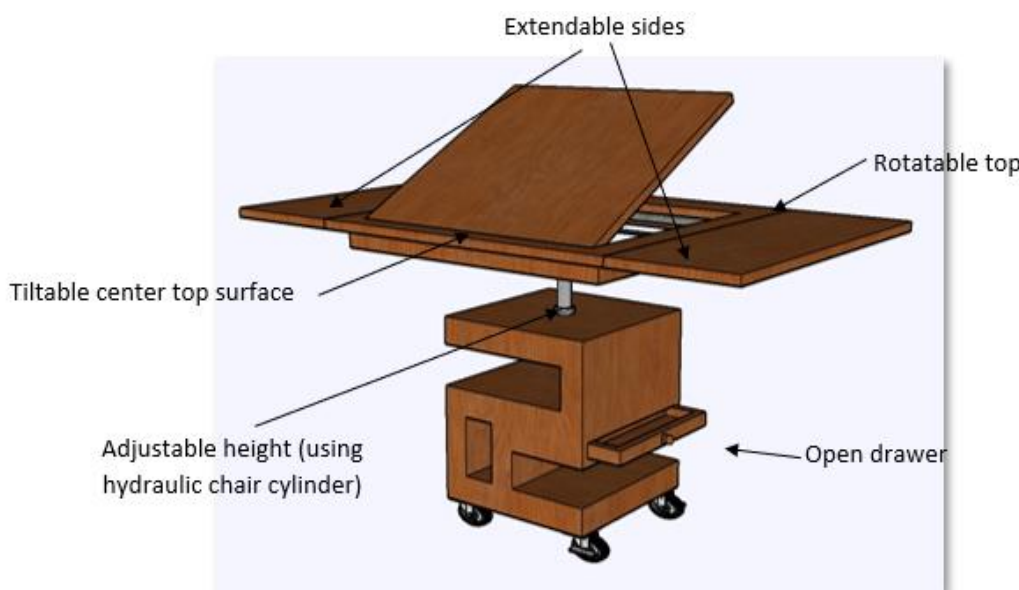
Perspective Drawing with Open Drawer, Tilted Surface, and Extended Extensions
